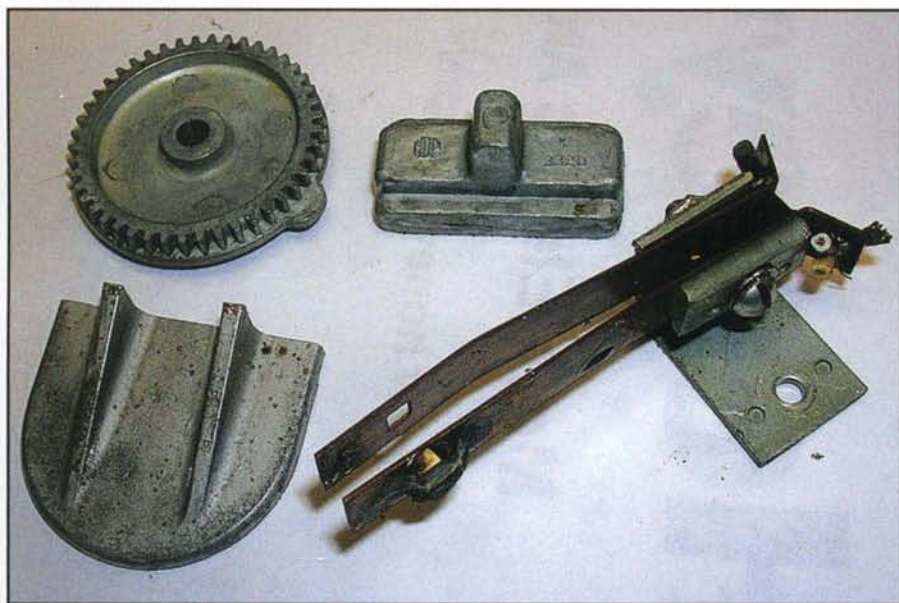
These are the parts that must be removed from the EL rotator. They are: the tabbed gear, two inserts (I believe they're shear pins), the tab removed from the body, and the overtravel switch.
